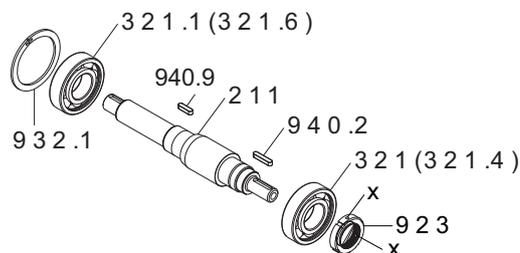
Pump shaft disassembly (bearing bracket with lifetime-lubricated roller bearings)
